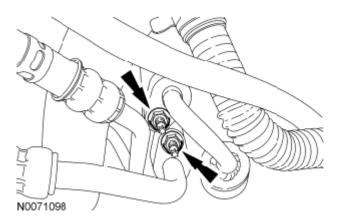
Locating A/C Tube Nuts Courtesy of FORD MOTOR CO.
